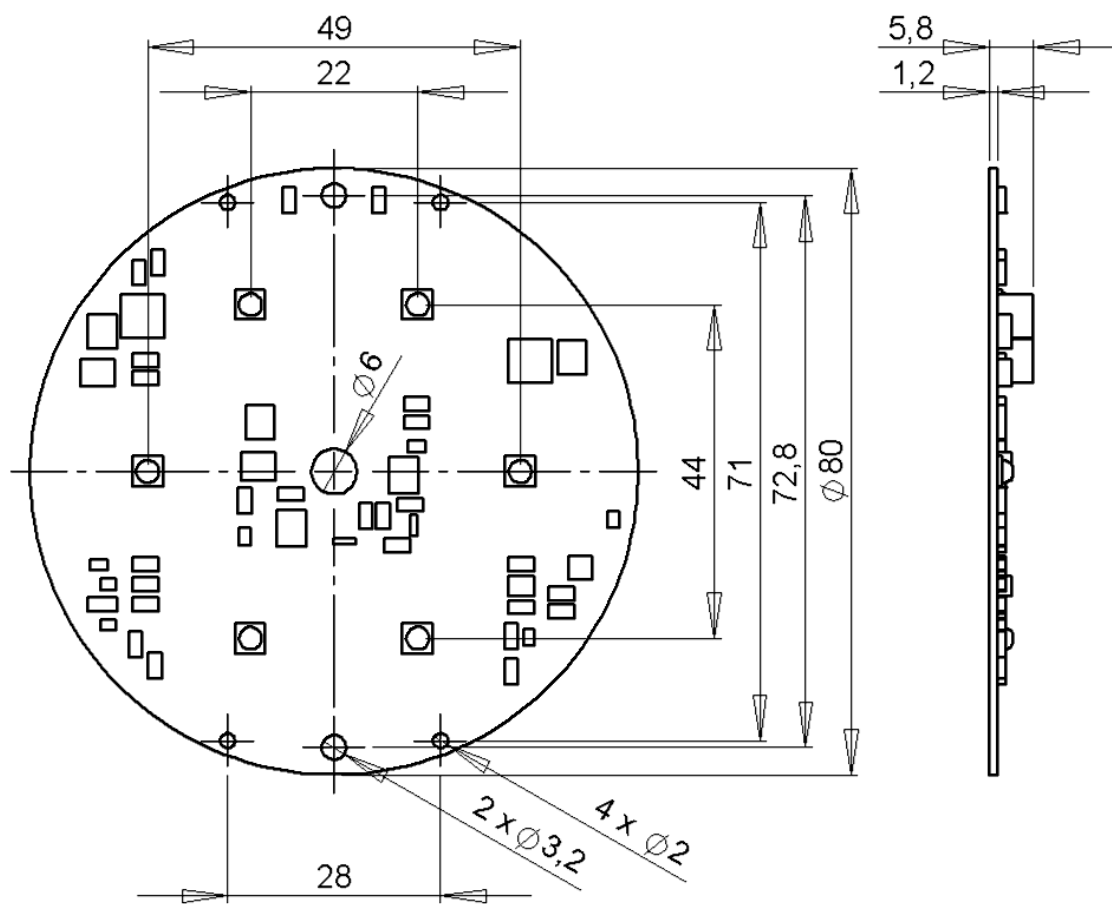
Technical drawing of LUMO 6XP ALU module (in mm).
